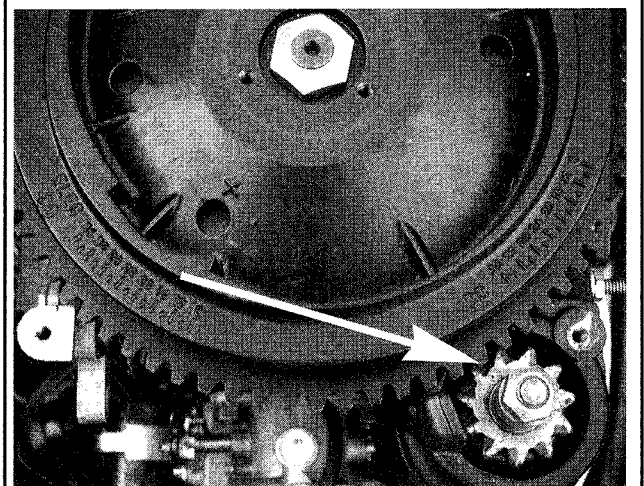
When actuated, the starter pinion gear meshes with the flywheel ring gear teeth in order to turn the flywheel
